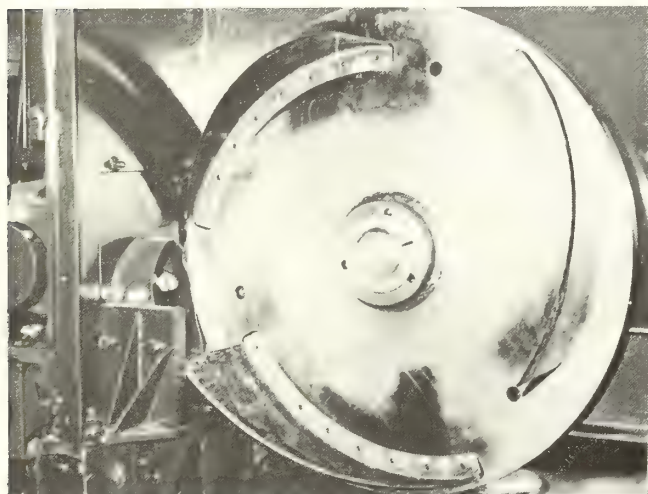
Cutter wheel with rear of cutting blades closer to center of wheel than the forward edge of blade (rotation counterclockwise).
